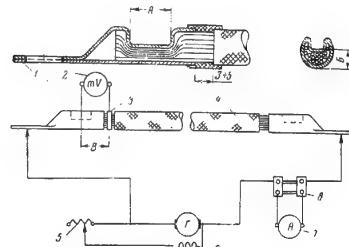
Fitting the Aluminium Wire in Lug and Circuit Diagram for Measuring Contact Resistance At Aluminium Wire Fitting Point
